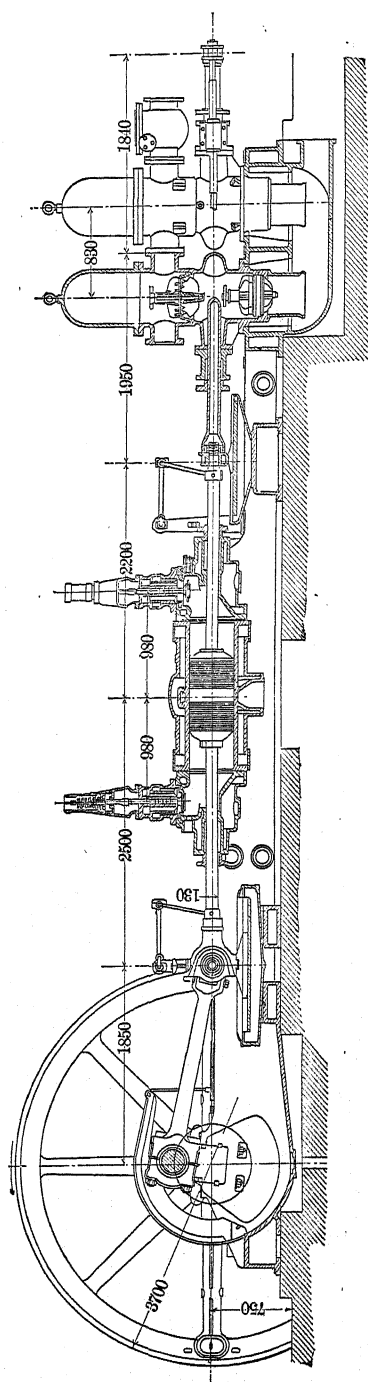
PLATE XIII.—ACCUMULATOR-PUMP WITH GAS-DRIVING, BY THE SIEGENER MASCHINENBAU-AKT.-GES., SIEGEN. (Longitudinal Section.)
